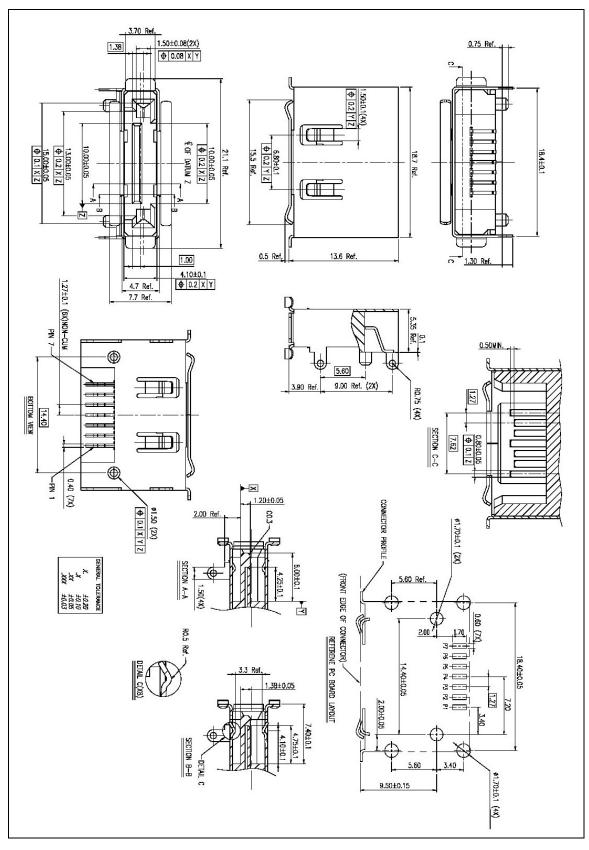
Mechanical dimensions of External Serial ATA RA SMT plug
